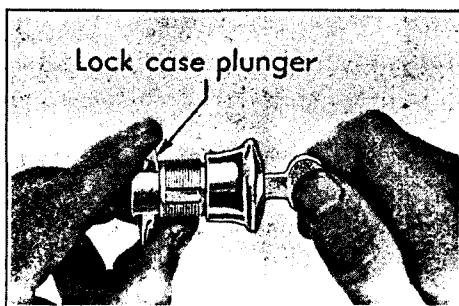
To remove the cylinder from fender well tire locks and glove box lock, insert key and turn clockwise, compress lock case plunger and pull out cylinder.
